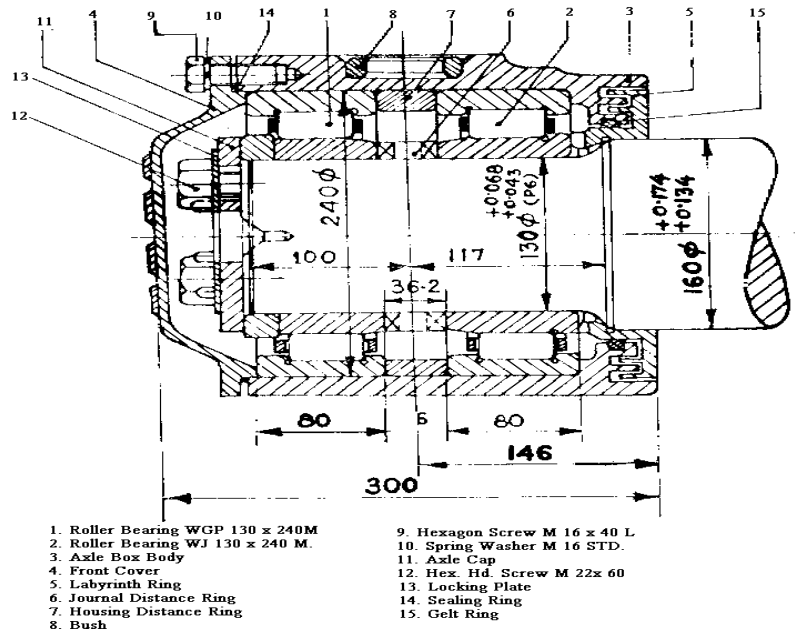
A - ROLLER BEARING AXLE BOX
